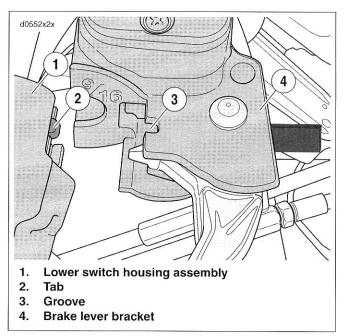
Master Cylinder and Brake Lever Bracket To Handlebar Switch Housing
